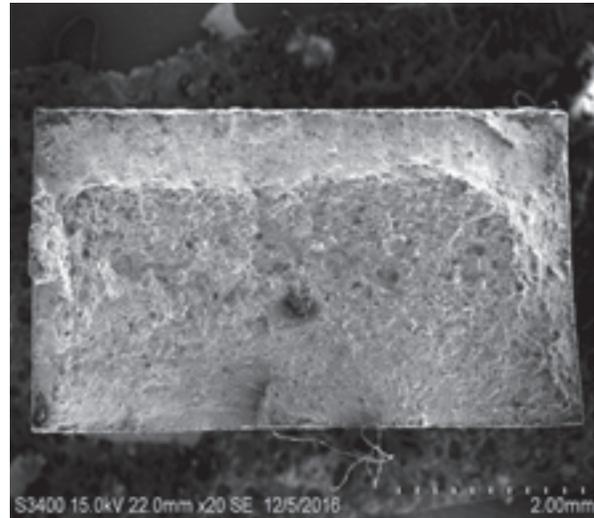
Fracture surfaces of tensile tested specimens of Ti-27Nb by using SEM
